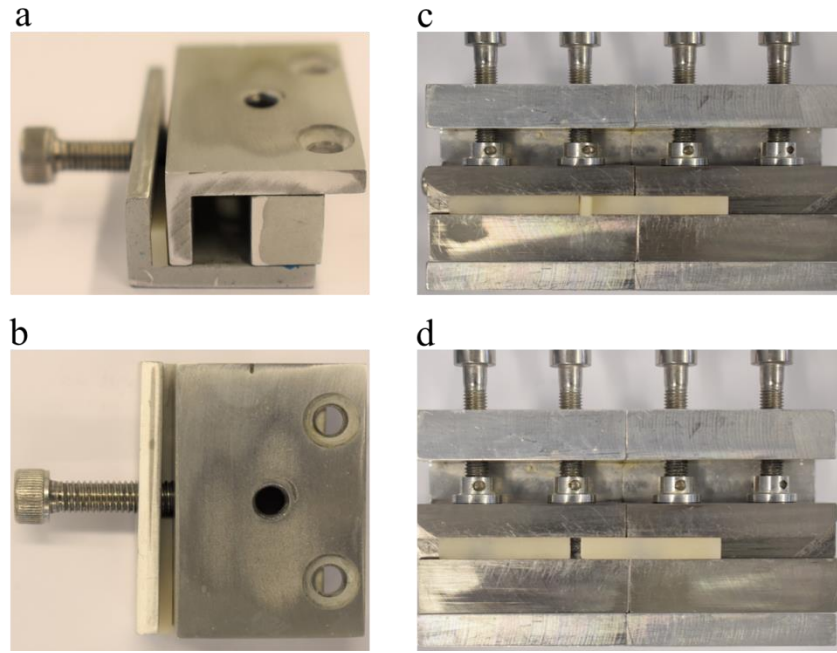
Test beam repair process. (a) Top view and (b) Lateral view of a grinding jig. (c) After a monolithic RBC beam had been tested, the fractured beams were returned to the mould with an interposed beam segment as a spacer to control the thickness of the joint. (d) After removal of the spacer, repair cavity ready for insertion of fresh RBC.
